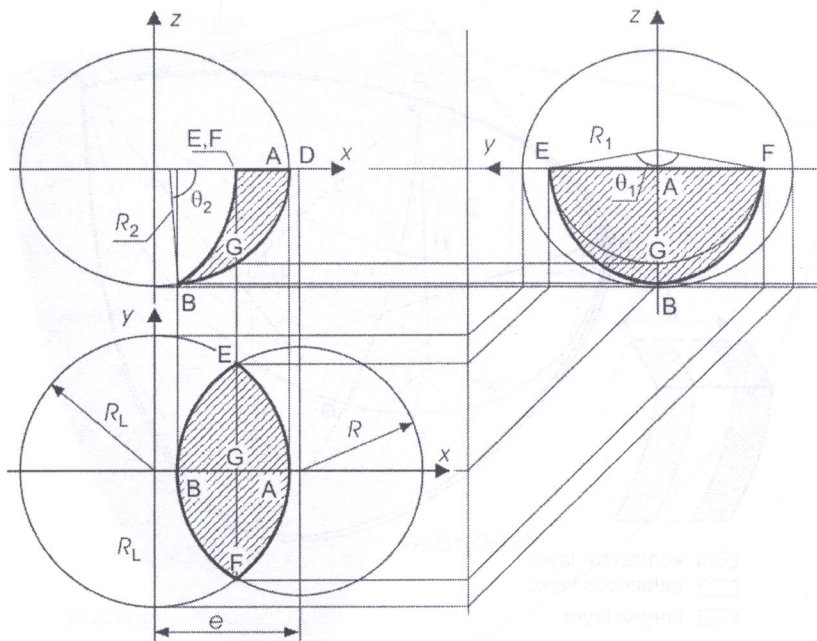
The detailed engineering drawing showing the 3 views of valve design
